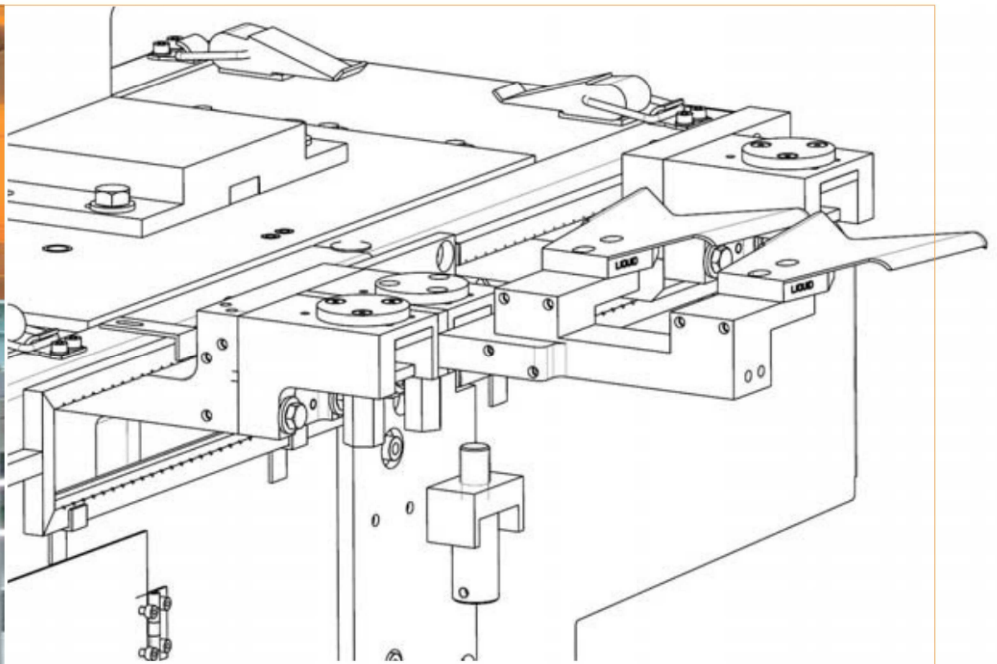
Schematic drawing of the shear blade holder and arm with integrated spray system for GPS IS machines
